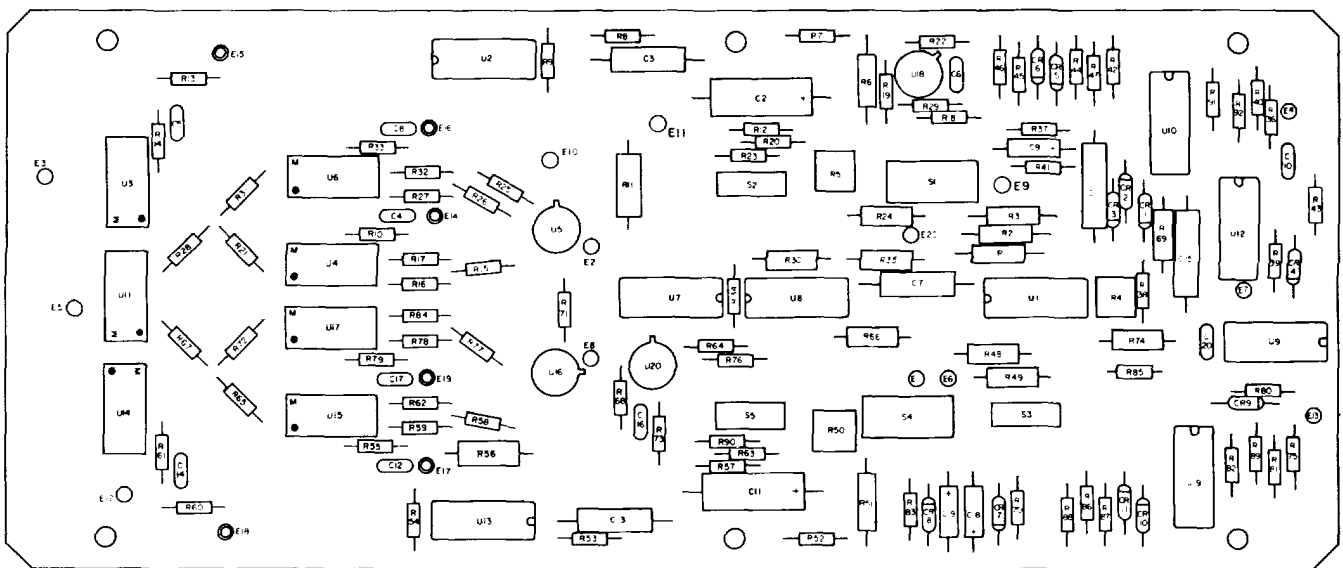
Modulation Control Circuit Card Assembly, 1A5A4A1 Parts Location Diagram
